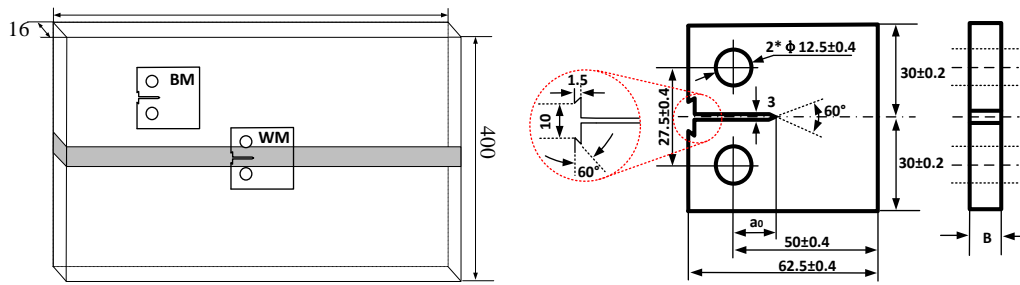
Fatigue crack growth sample illustration. (a) Schematic diagram of CT specimens from weld plate (mm); (b) Geometry of CT specimens (mm).
